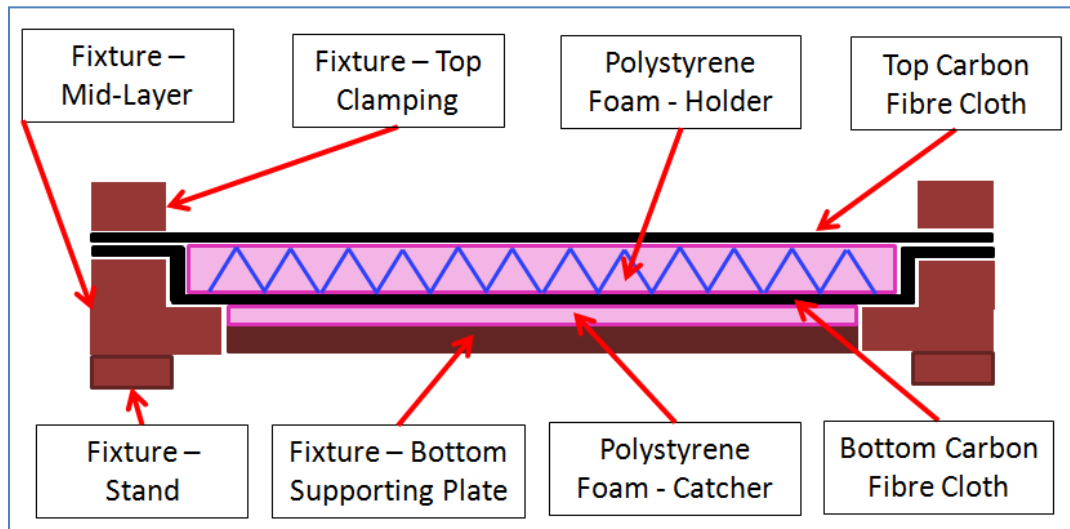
Cross-section of the TCS panel fixture (not to scale)
